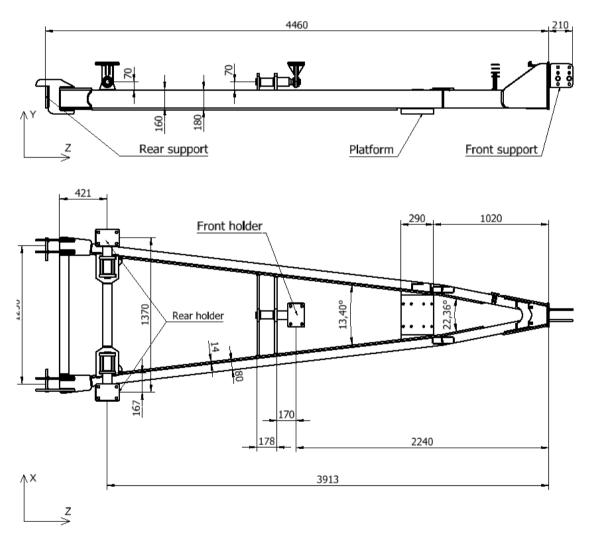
Dimensional drawing of supporting frame of low EVO forage trailer
